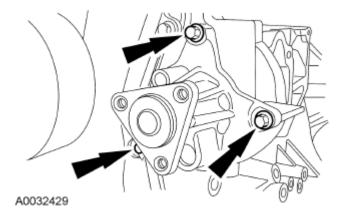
Locating Coolant Pump And Bolts Courtesy of FORD MOTOR CO.
